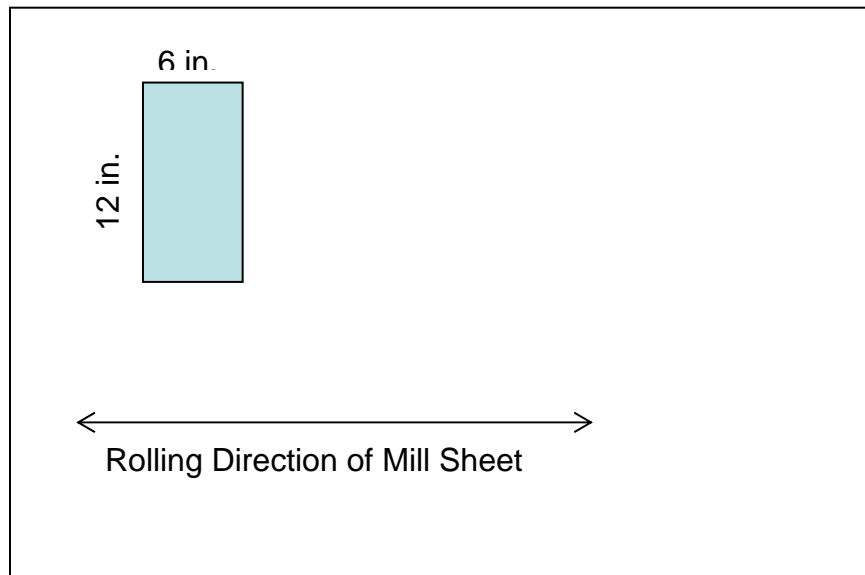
The 6 in. × 12 in. plate is cut from an A537 mill sheet – the 6-inch side is parallel to the rolling direction of the mill sheet.
